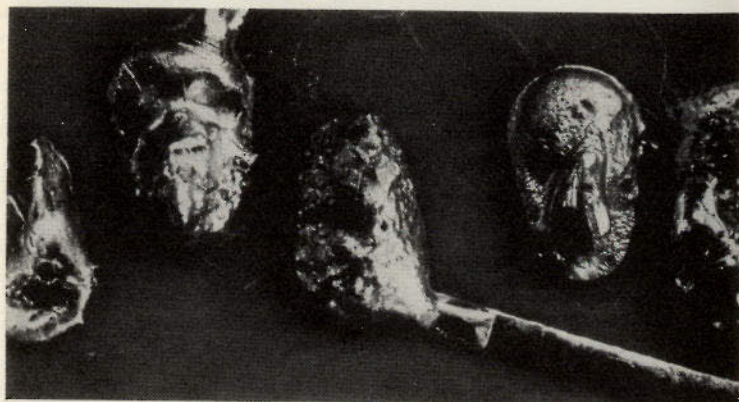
A cold joint. Cold joints are caused by excessive movement of the joints during formation.
